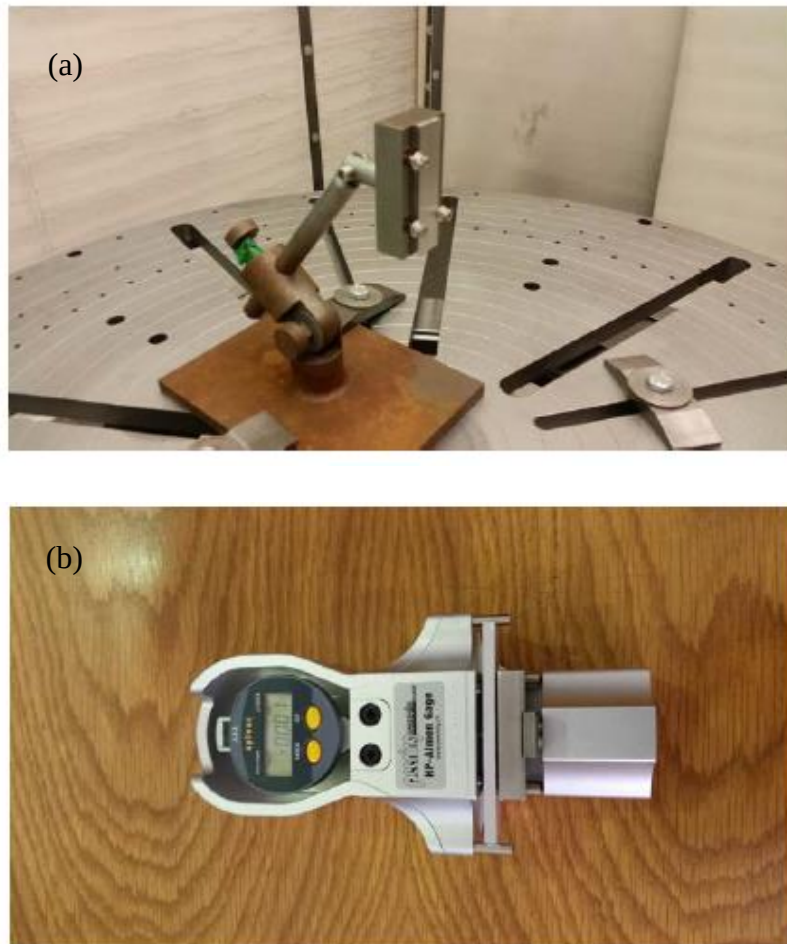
Shot Peening of the Almen strip (a) Test Block used to hold Almen strip, and (b) Almen Gage [18].
